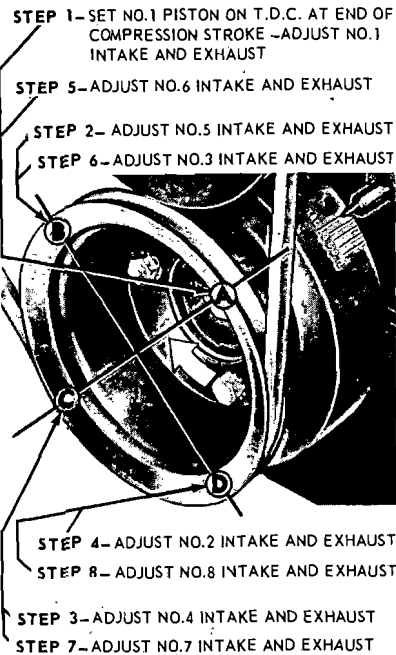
289 V-8 Valve Clearance Adjustment Points
